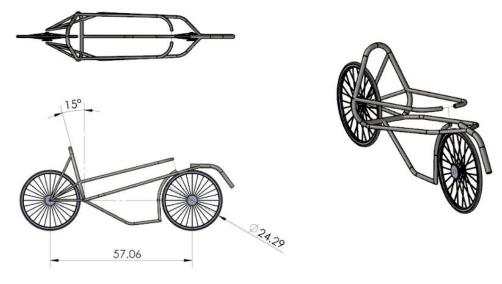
Drawing view of the 3D profile of the frame. Important dimensions called out: roll hoop angle from vertical, wheelbase, and wheel outer diameter.
